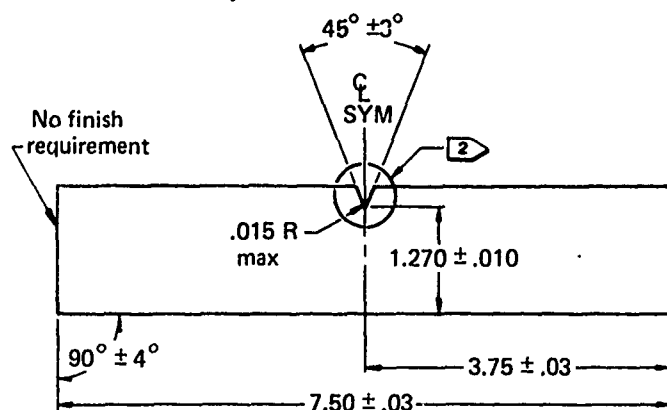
SHORT NOTCH BEND SPECIMEN GRIP
